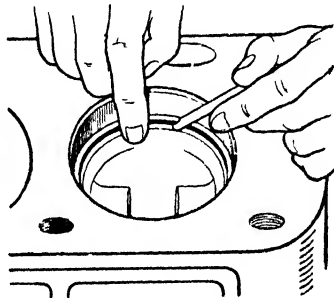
Method of measuring Piston Ring Gap Clearance.
